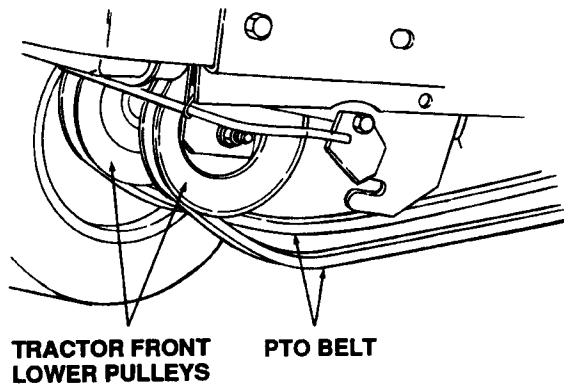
Place PTO Belt In Front Idler Pulleys
